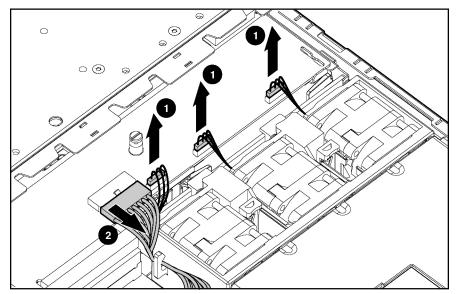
Disconnecting I/O system fan assembly and power converter module power cables
